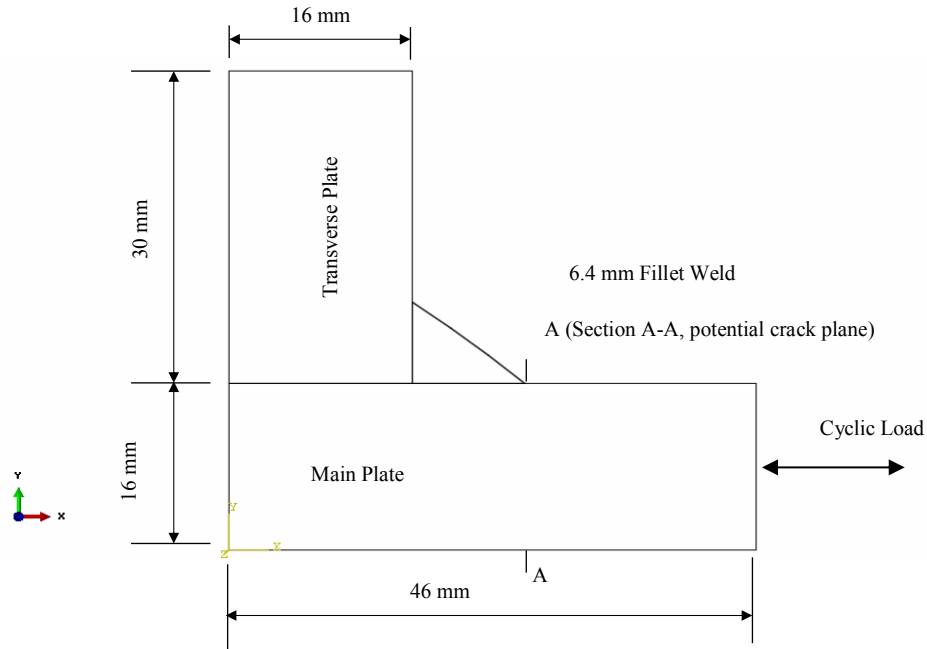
Finite element model for cruciform welded detail using nominal fillet weld 6.4 mm.
